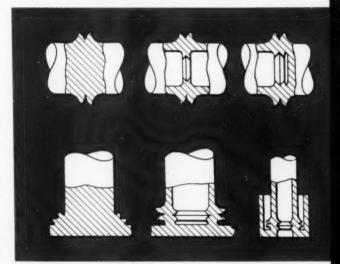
Examples of composite work-pieces that have been produced by friction welding.
